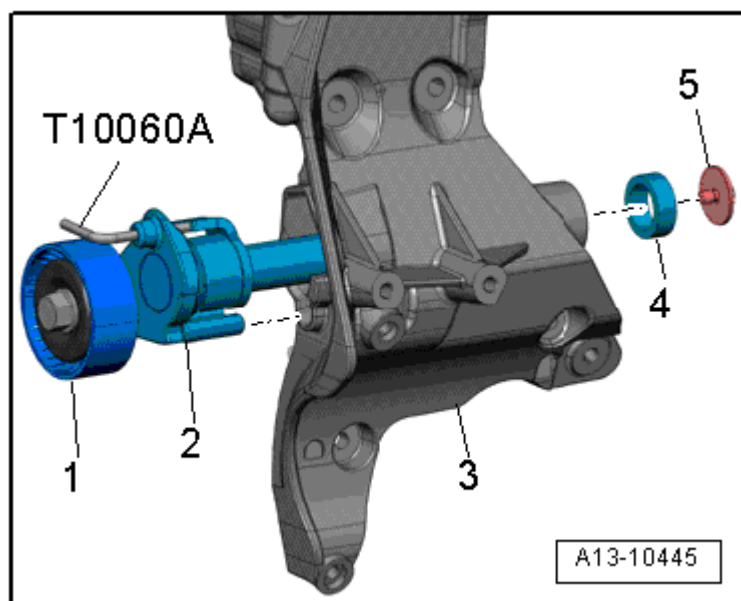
Identifying Tensioning Device For Ribbed Belt
